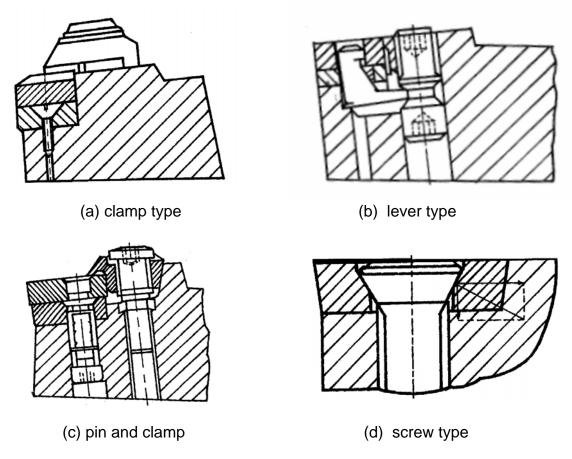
Mounting of tool inserts in tool holders by mechanical clamping.
